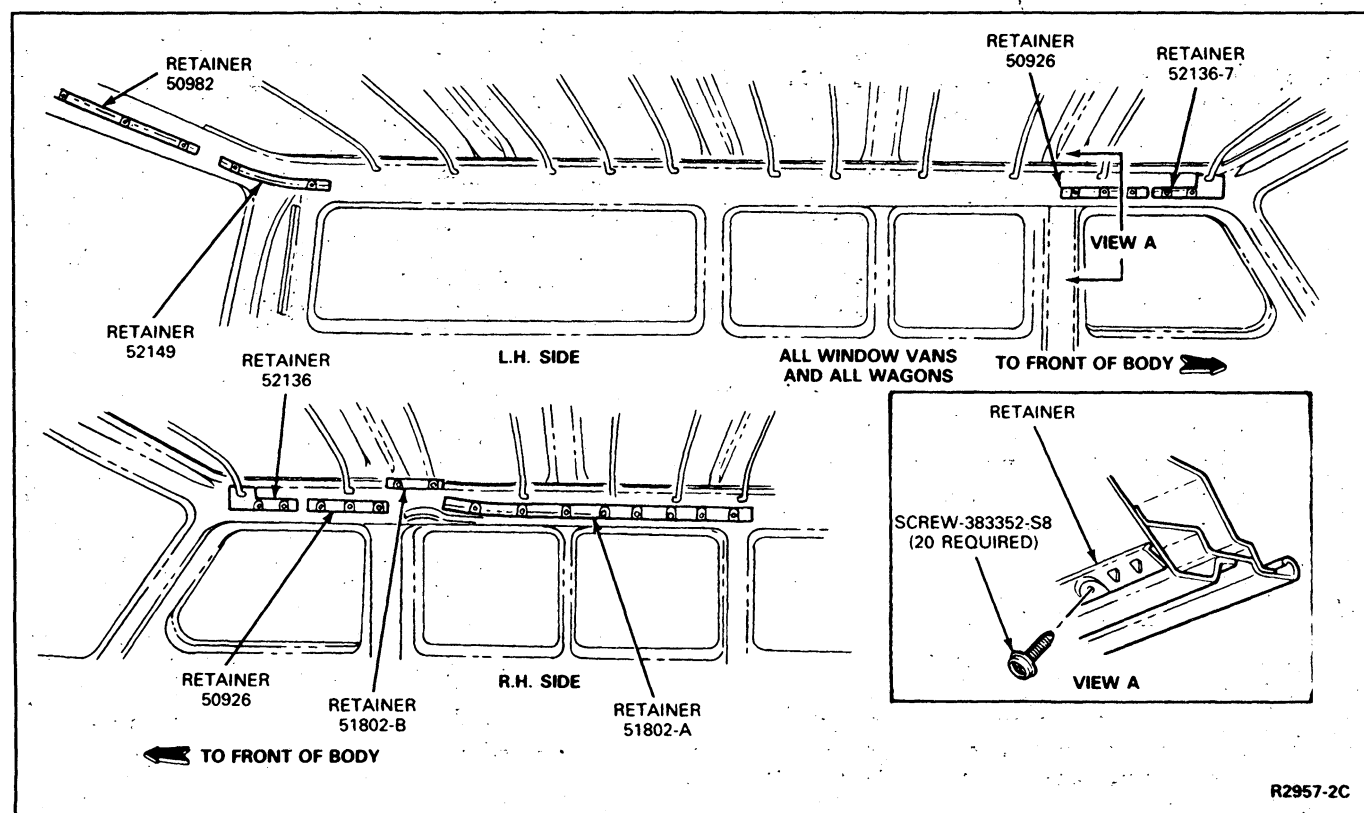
R.P.O. Headlining Retainers—E-150—E-350 Sliding Door
